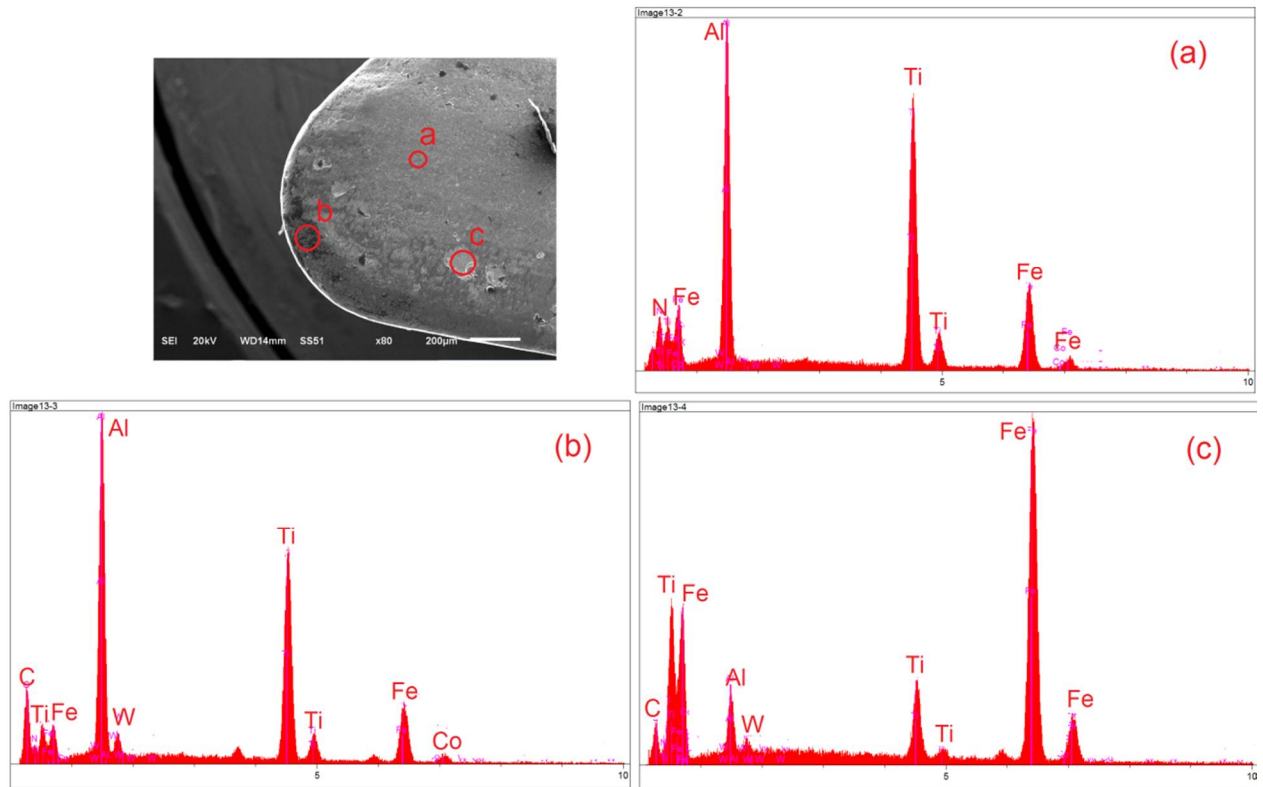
SEM/EDX images of cutting tool used at 126 m/min cutting speed after third turning process (L=1428 mm)
